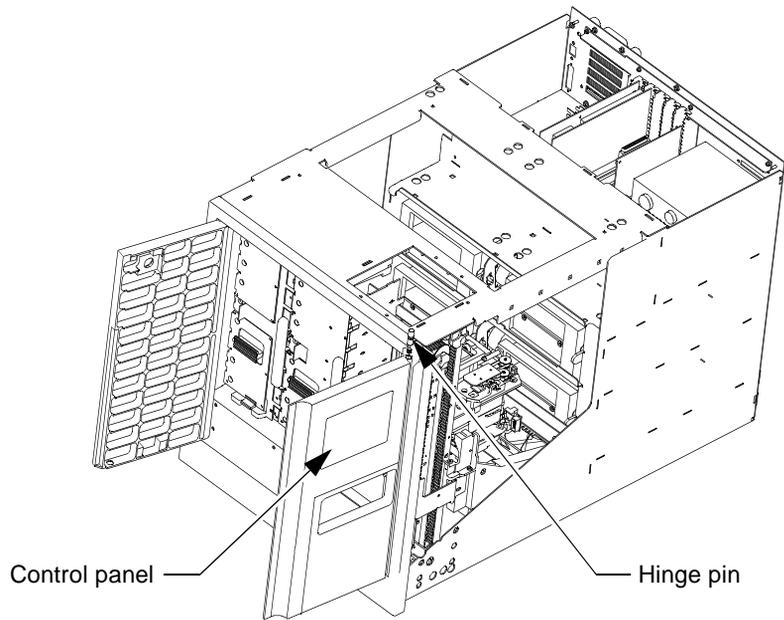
Right Door Assembly, With B/W Control Panel
